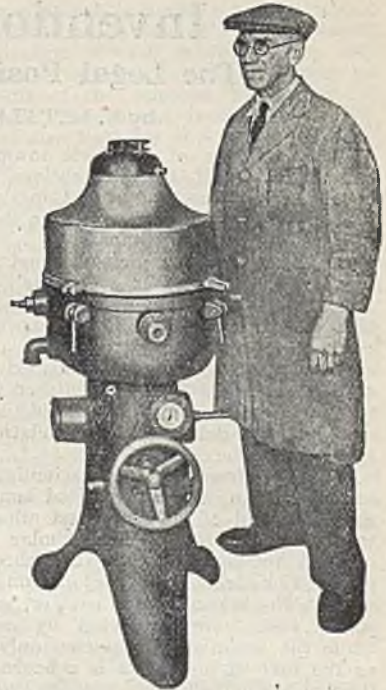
(right). To the scientific welding engineer this repair presented no difficulty. In addition to welding the cracks, the dents in the cover were also removed, and when the machine had been thoroughly cleaned and the cover re-polished it was indistinguishable from new, and just as efficient.
